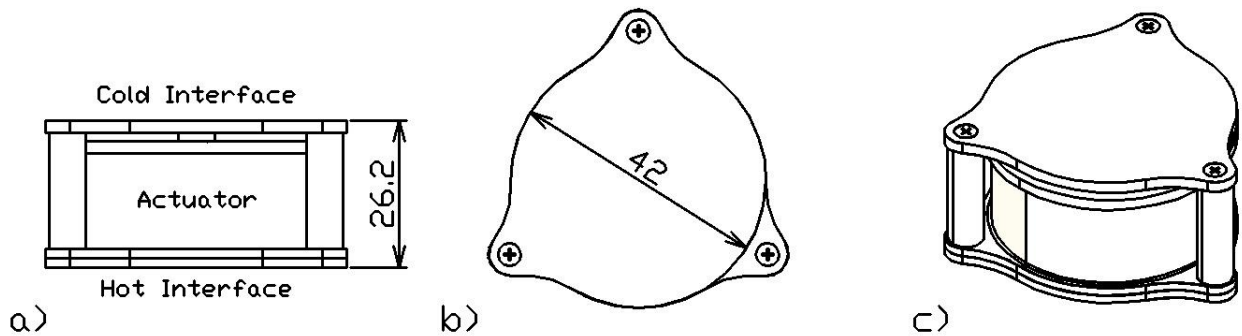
Miniaturized Heat Switch (a) front b) top c) isometric view; dimensions are in millimeters).
